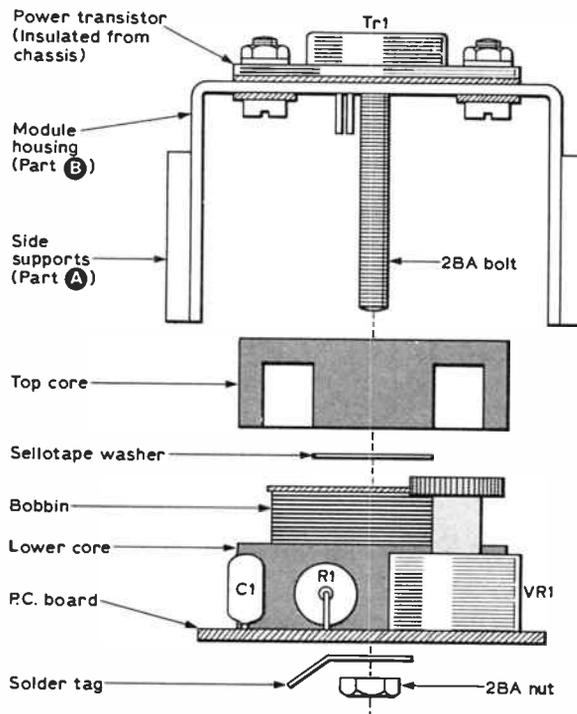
An exploded diagram of the oscillator transformer and mounting.
